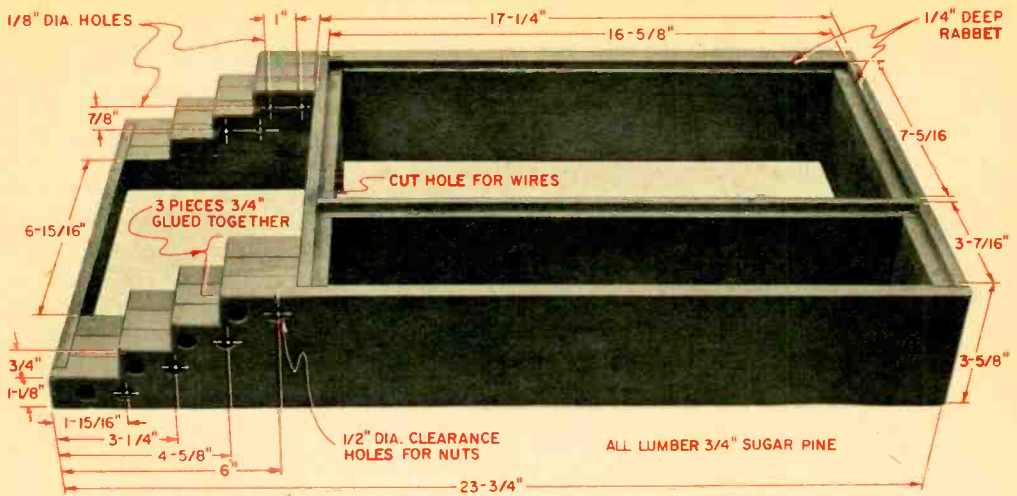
Frame for the sender is built entirely of 3/4-inch-thick sugar pine. Check switches before installing. It will be a big job to remove one of the dowels from the 1/2-inch-diameter nut-clearance holes if switch has to be taken out. Matrix and relay chassis can be covered with 12x17x4-inch chassis.
